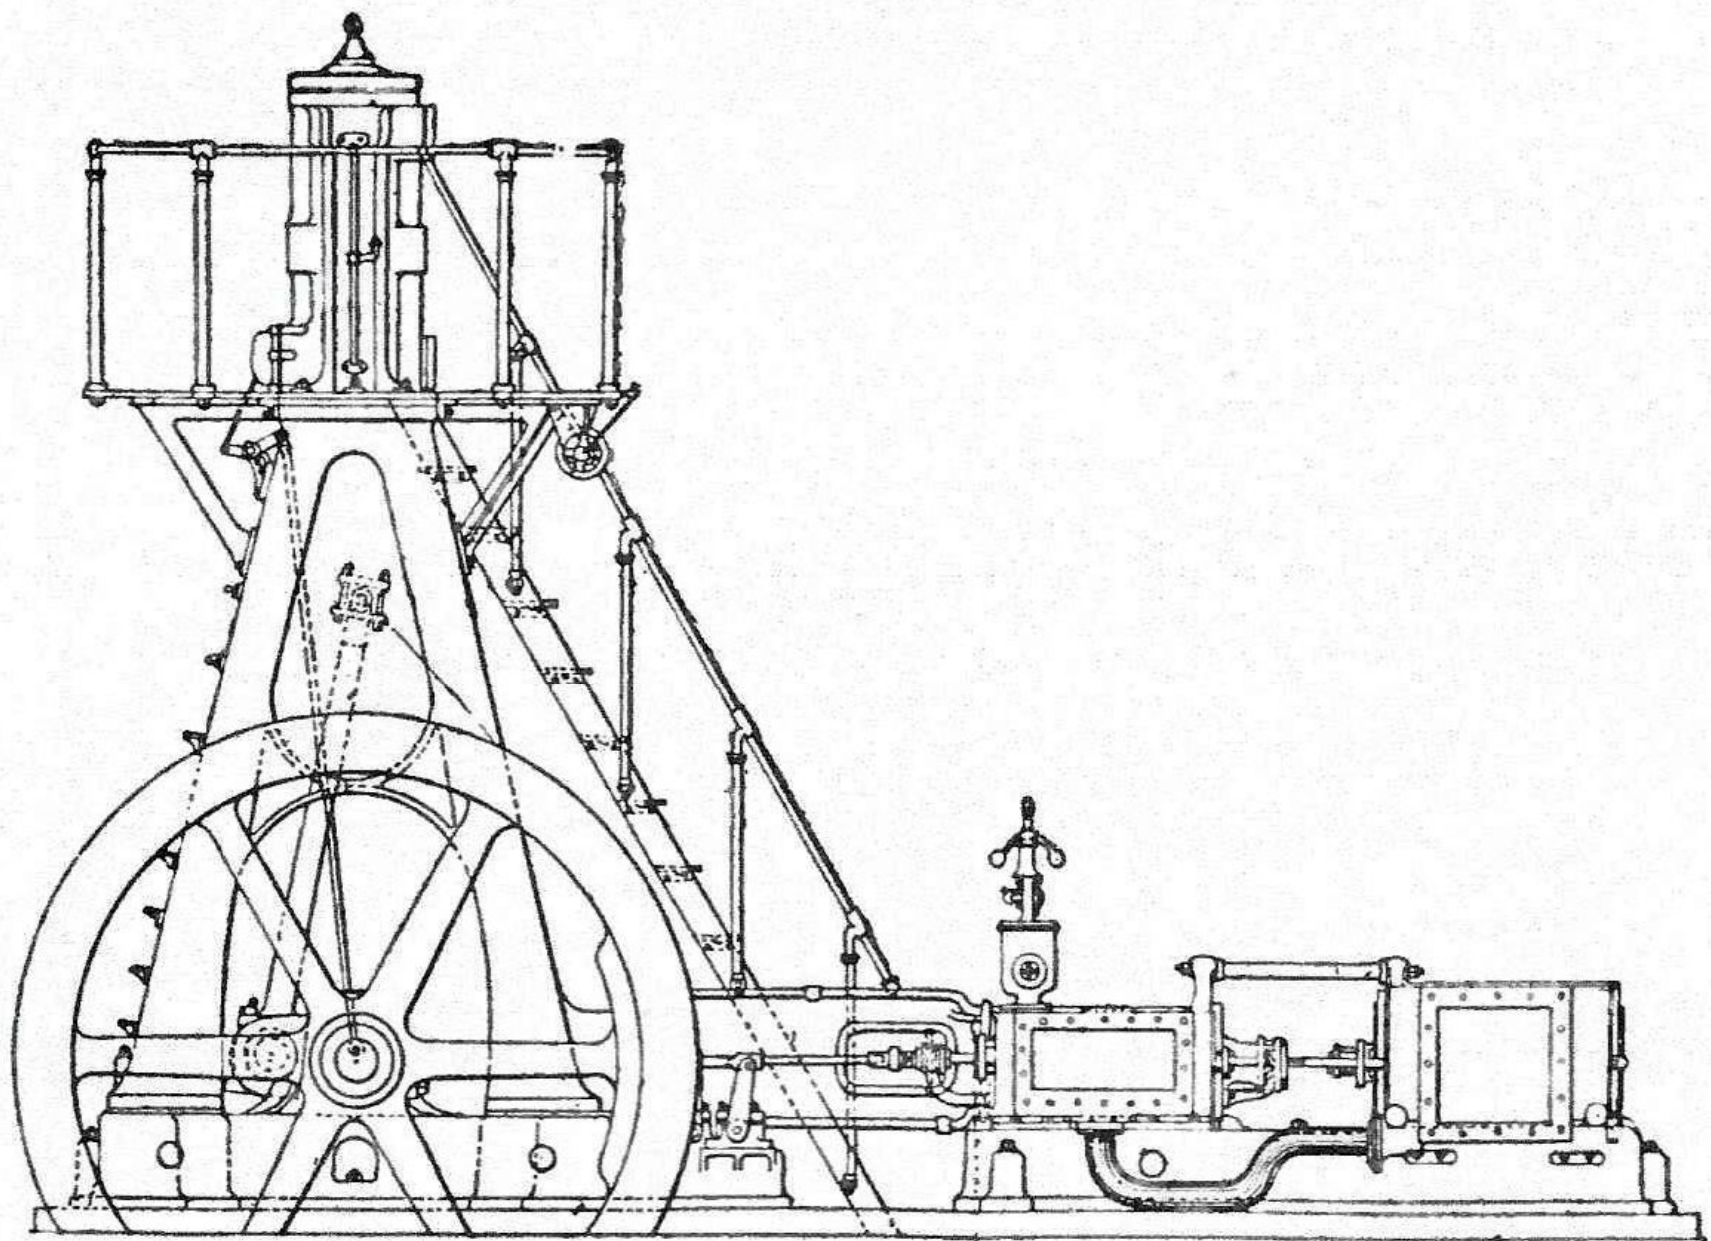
Double-Acting Vertical Type De La Vergne Ammonia Compressor and Horizontal Tandem Condensing Engine. Side Elevation of Complete Machine.
